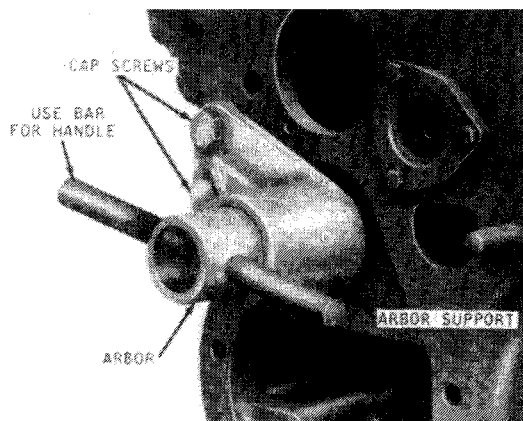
Install special support and arbor to hold parts while assembling differential drive shaft. Refer to text.
